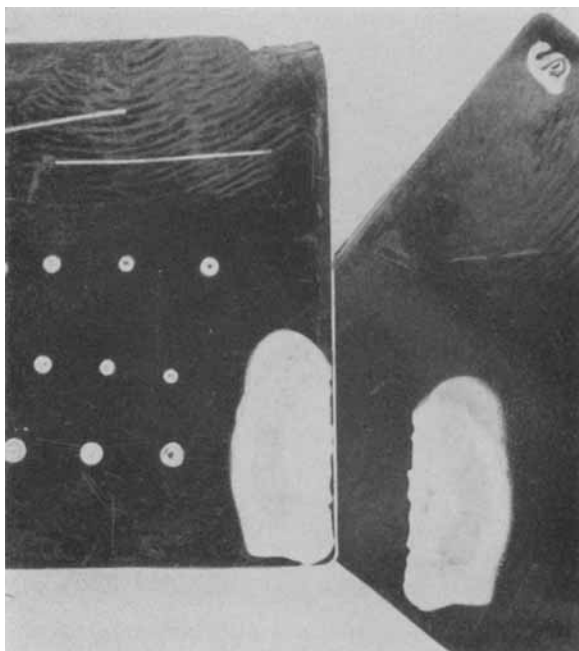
Corrosive areas between superimposed plates of 832 SK.
